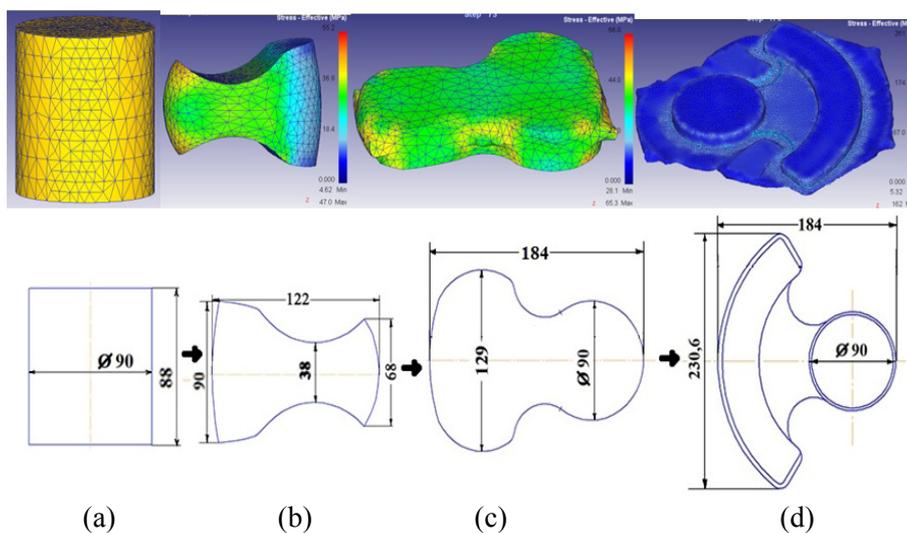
Technology with preliminary profiling of upsetting by convex plates with eccentricity: a – workpiece; b – profiled workpiece; c – preliminary forging; g – final forging
